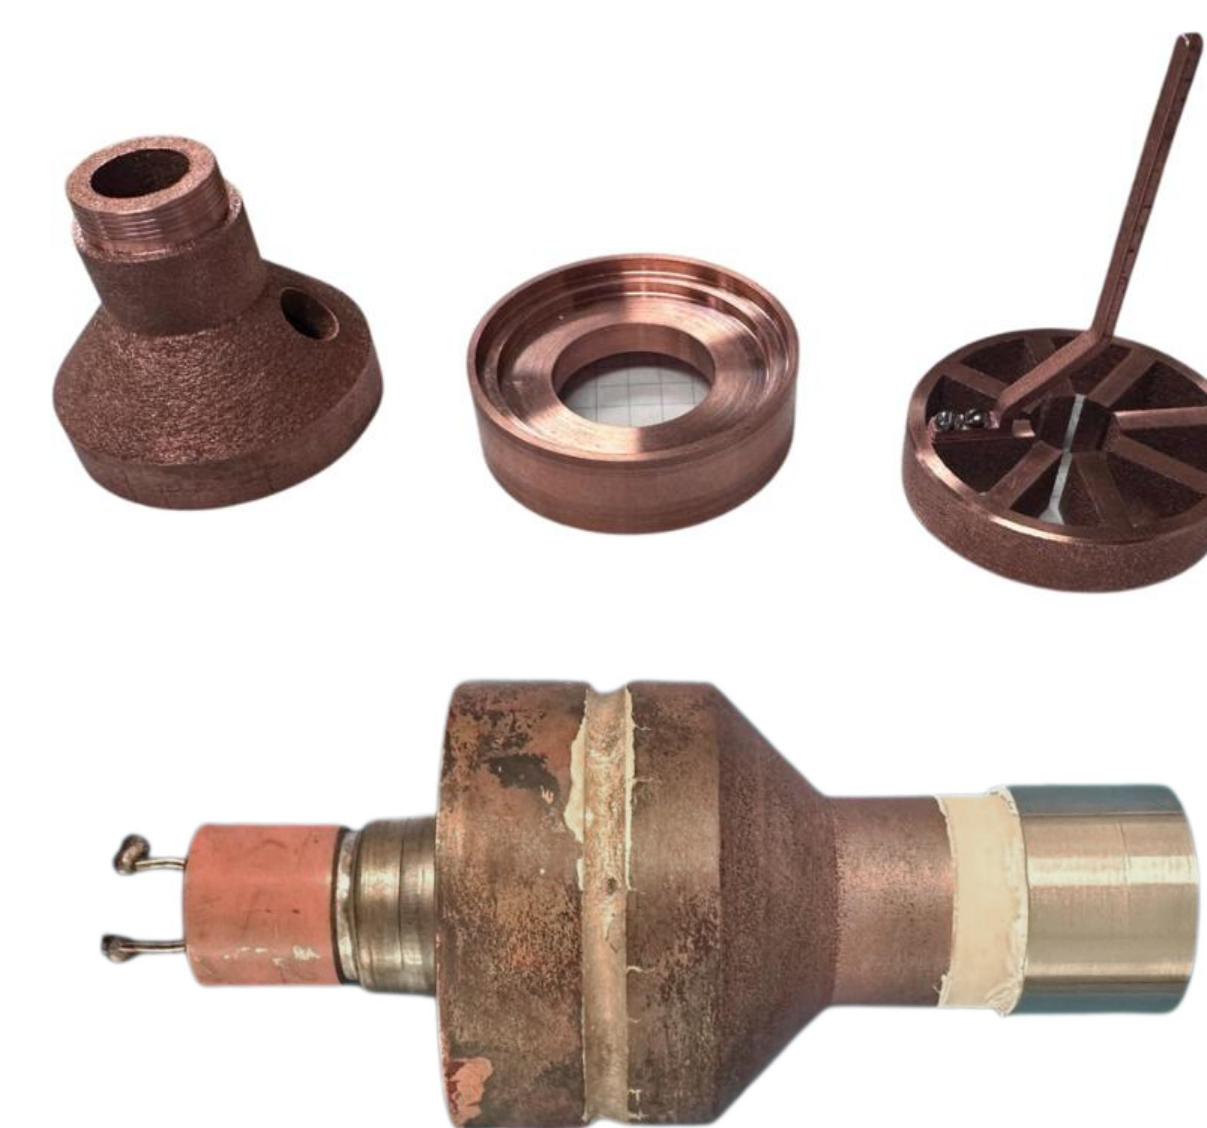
Parts of the Magnetron Tube and the Final Assembled AM Magnetron
